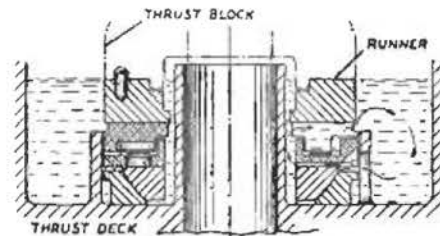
Section of three-shoe vertical thrust bearing, showing oil circulation and main features of mounting.
